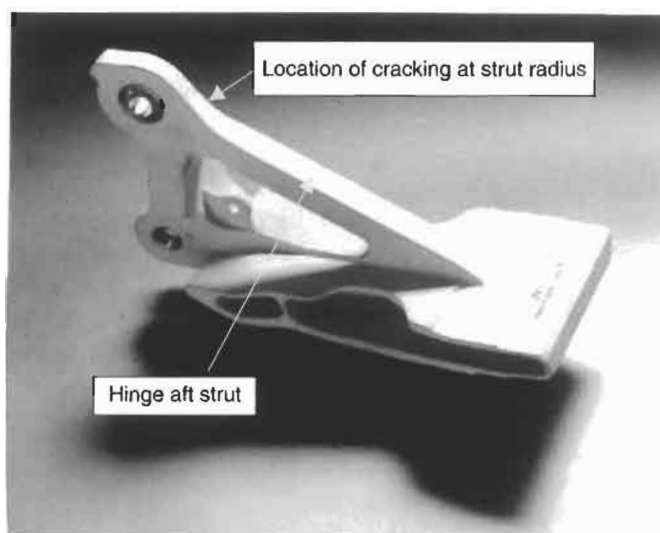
Photograph of the aileron, showing the hinge aft strut and location of fatigue cracking.
